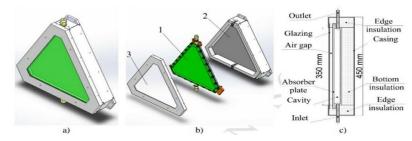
a) Triangle flat solar thermal collector assembly, b) exploded view, and c) collector's cross-section [15]
